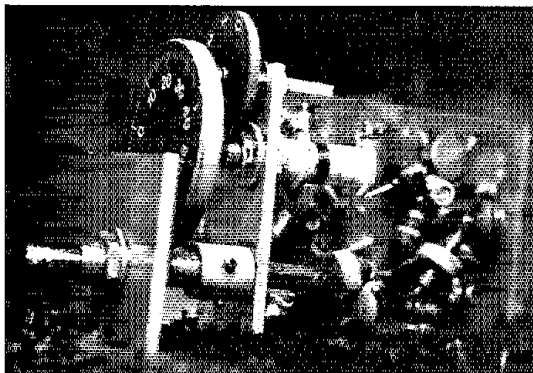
The inner construction of the precision-tuned VFO. Behind the large main tuning dial is the smaller counter dial. Beneath the dials is the sleeve with setscrews mentioned in the mechanical parts list. The manner in which L1 is mounted is clearly visible in the component area.
